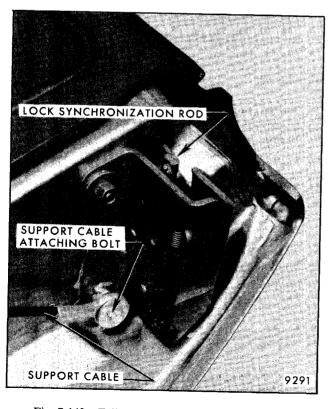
Tailgate Upper Left Lock Assembly
